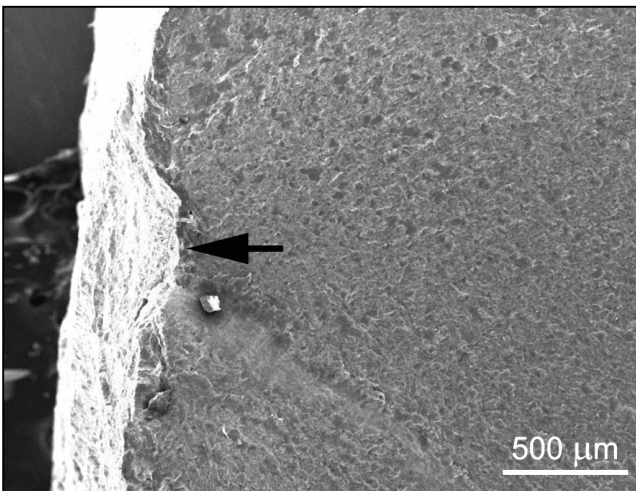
Initiation of fatigue crack on the surface corrosion dimple marked by the arrow. Stress symmetrical loading
